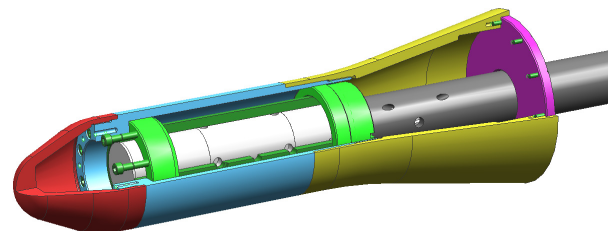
CAD section view of the HB-2 100 mm dia. model mounted on a 2-inch Able wind tunnel balance
